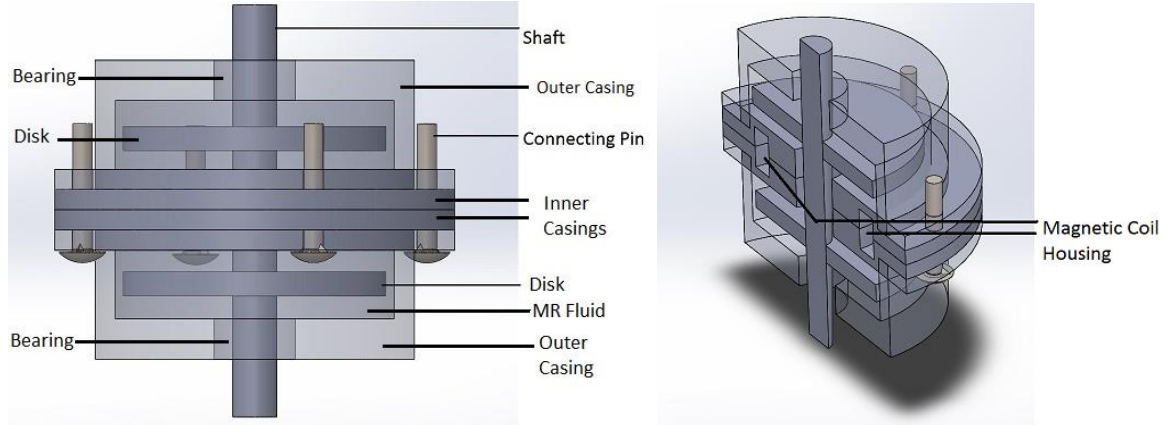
Front view of CAD model of MR brake (left), Cross-sectional view of MR brake(right).
